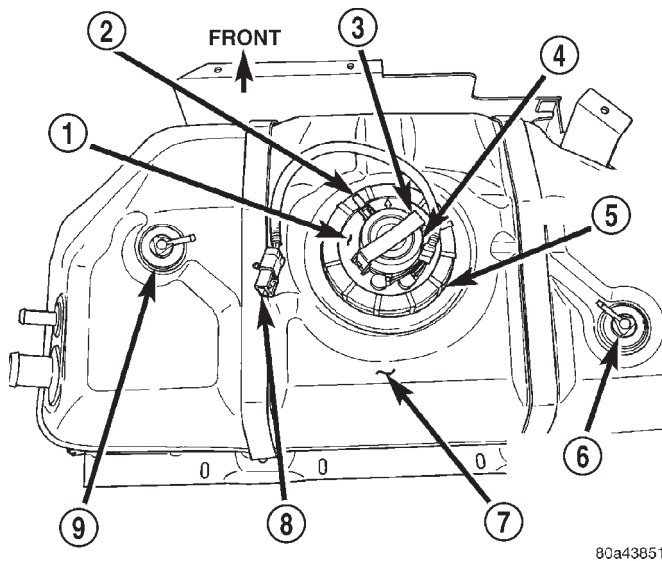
Top View of Fuel Tank and Fuel Pump Module
